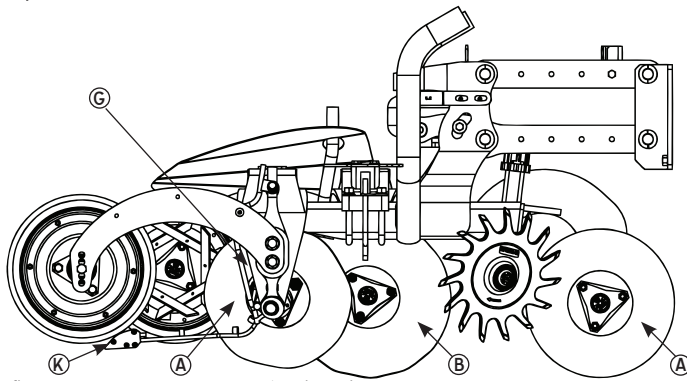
7772-HS-AIR-LH Right Side View
